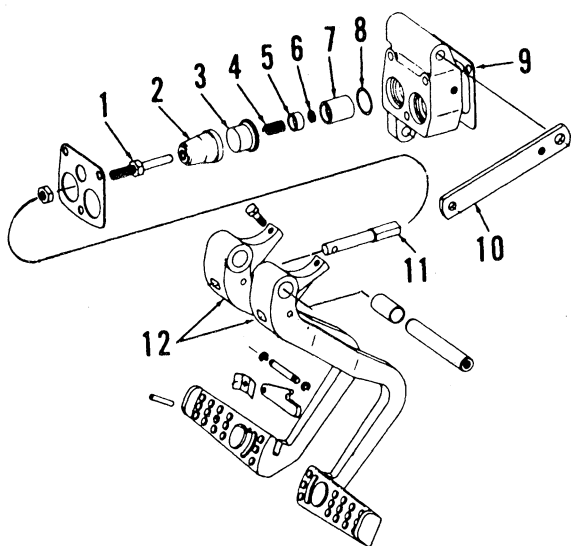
A—Exploded view of brake valve cover, pedals and associated parts. Right and left brake parts are identical.
